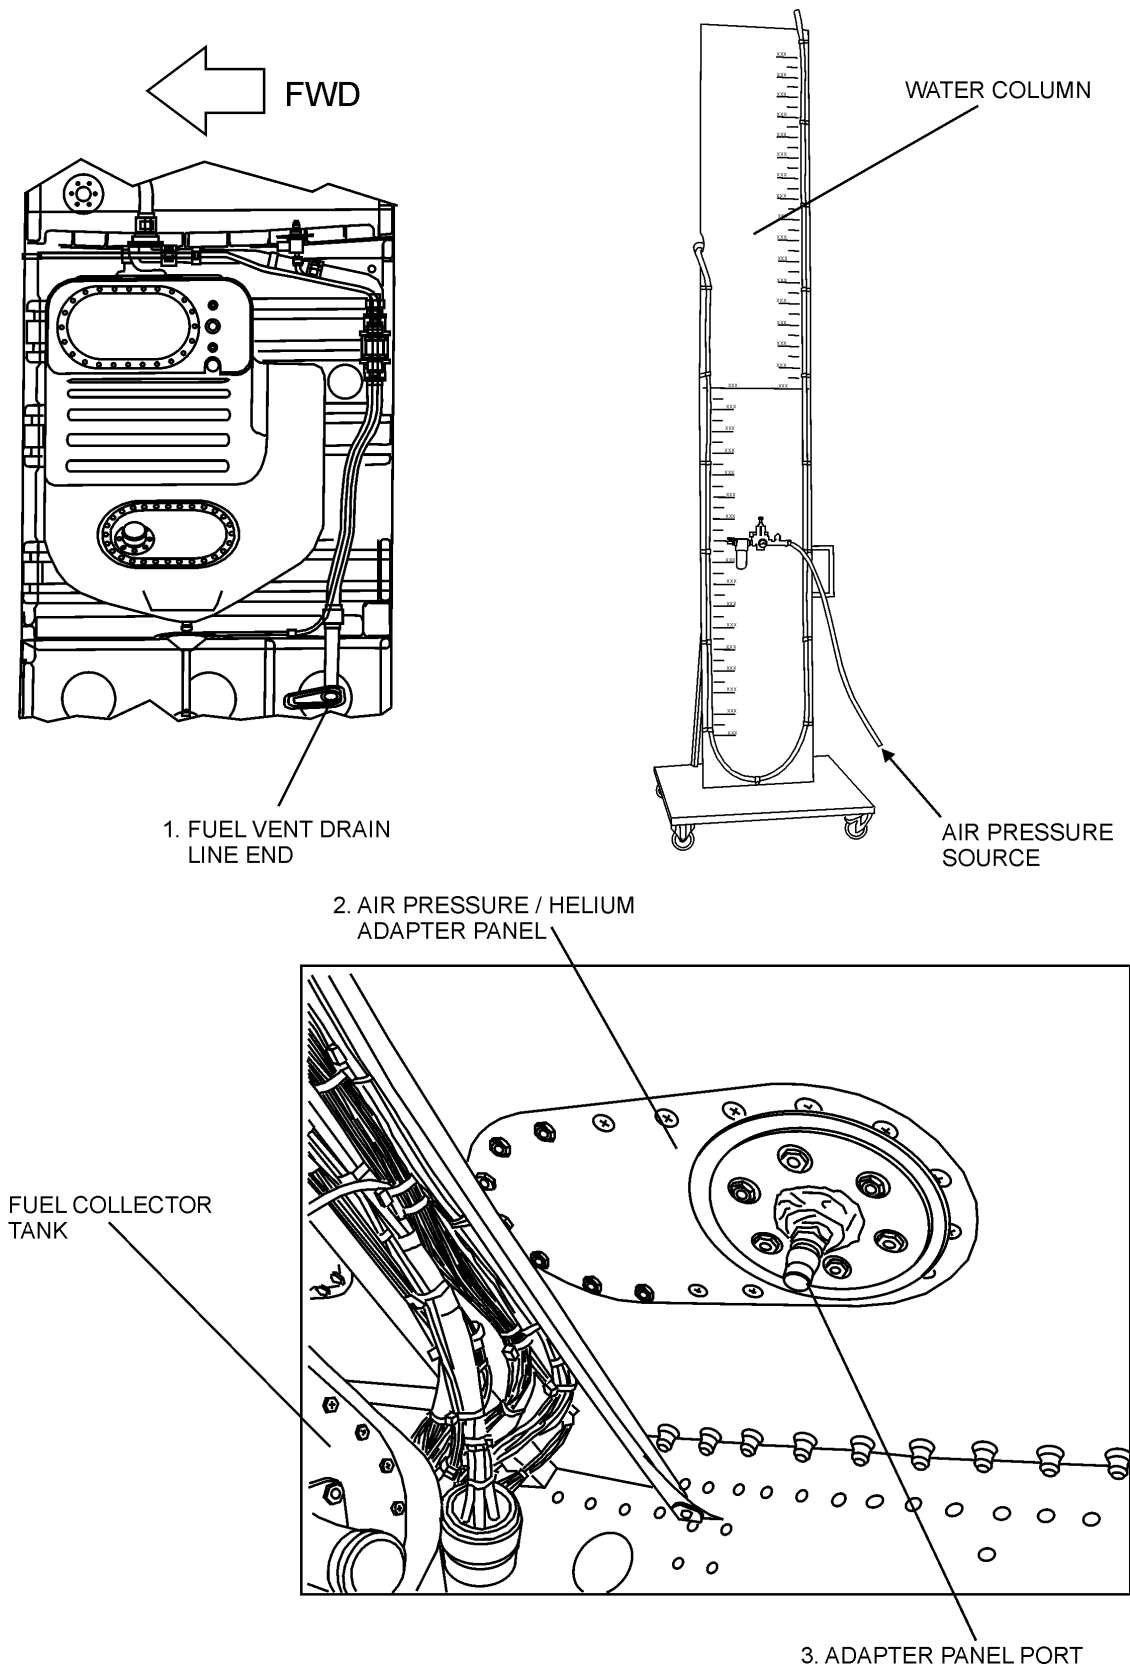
Fuel Tanks Access Panels and Components - Leakage Check (Sheet 1 of 6)
